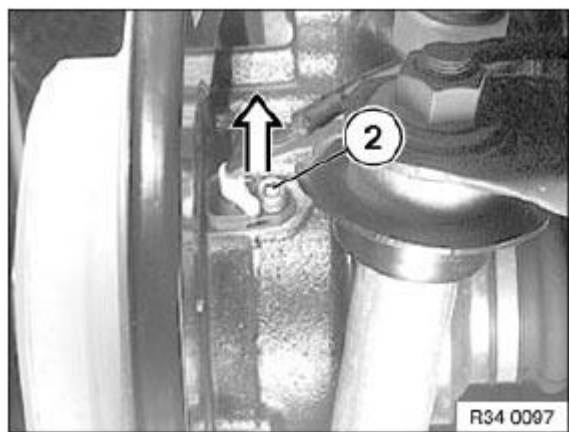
Identifying Hexagon Socket Head Cap Screw
